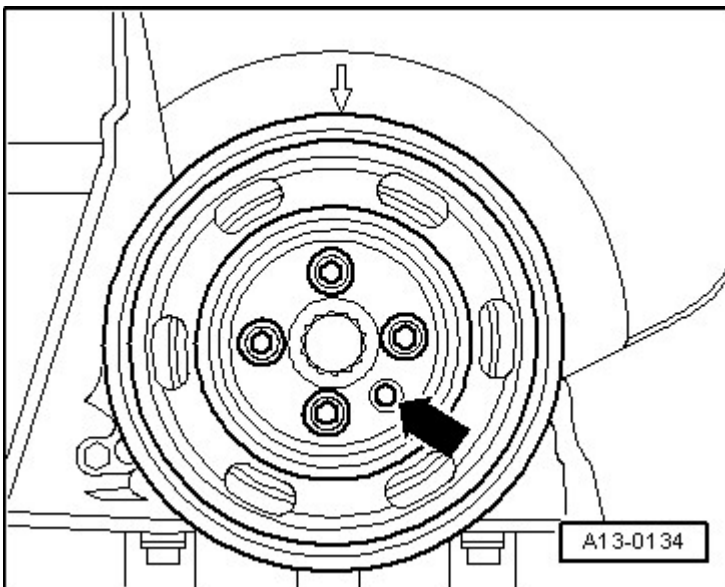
Installing Crankshaft Belt Pulley With Original Bolts
